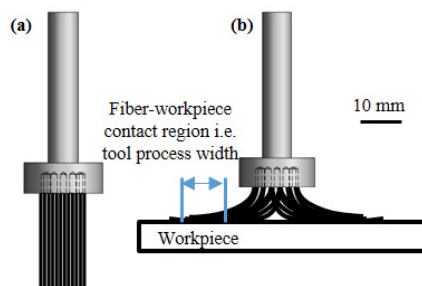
Fiber tool design; (a) disengaged (b) engaged with workpiece
